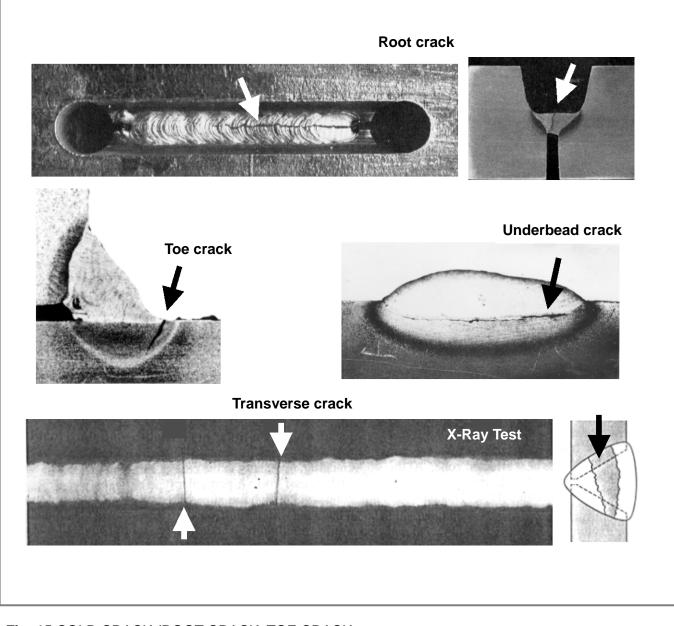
COLD CRACK (ROOT CRACK, TOE CRACK, UNDERBEAD CRACK, TRANSVERSE CRACK)
